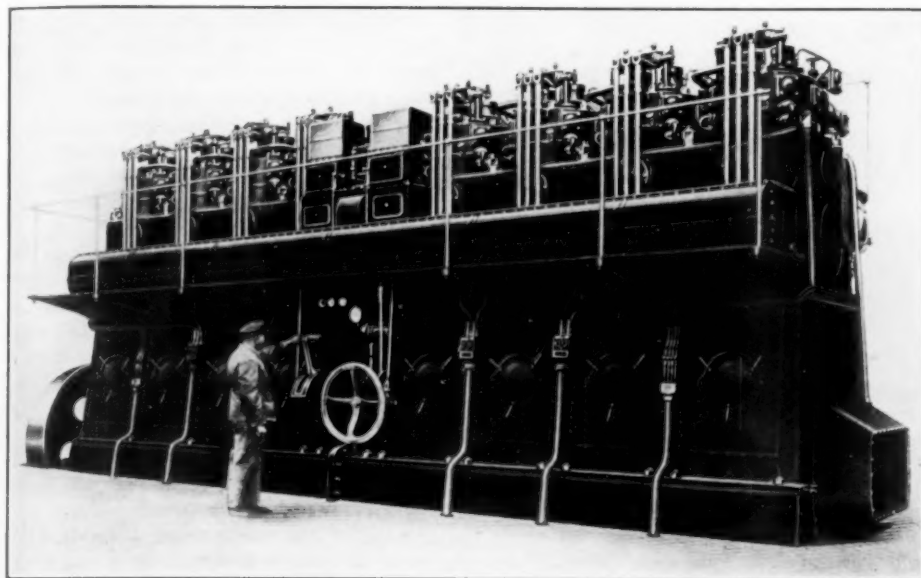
DEUTZ 1200-HP. SOLID-INJECTION DIESEL ENGINE
